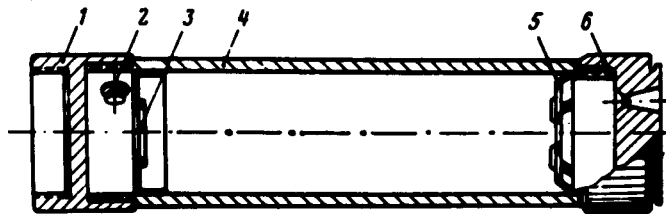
Design of engine for solid-propellant rocket missile. 1) Forward connection device; 2) frame of igniter cartridge; 3) grain trap (spacer); 4) tube of combustion chamber; 5) diaphragm; 6) nozzle assembly.
